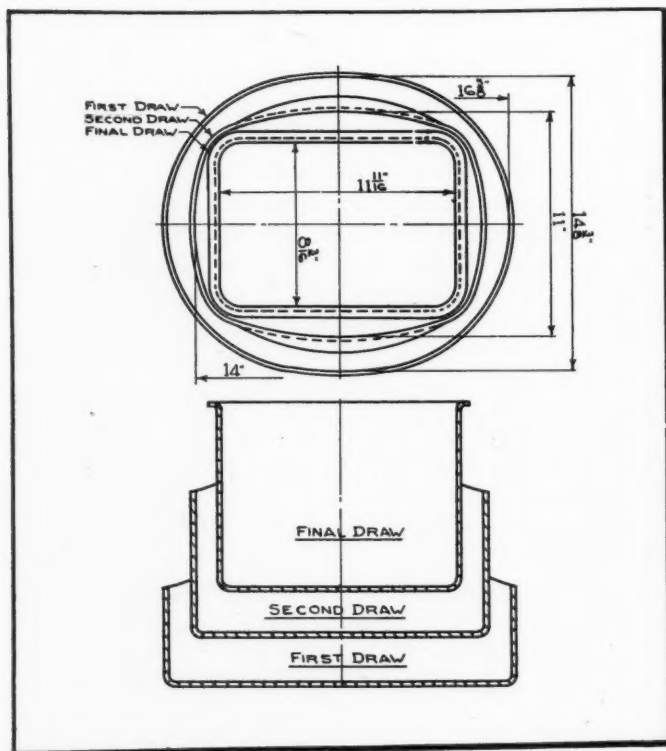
Sequence of operations employed in drawing a deep rectangular shape from 3S aluminum alloy. The elliptical shape of the initial draws aids metal flow
